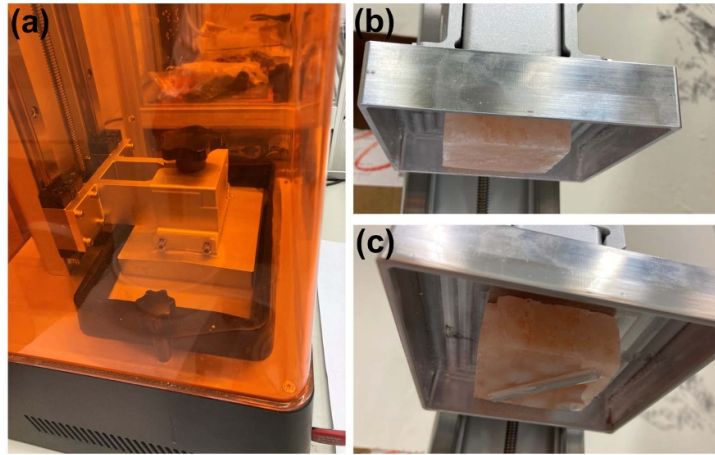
Fabrication of AFMSs and samples: (a) the 3D printer for photolithography with photosensitive resin inside its vat, and the building plate is immersed in the resin; (b) the modified building plate before photolithography, which is a rectangular cavity adhered with a salt brick; (c) after photolithography, the material sample is adhered to the salt brick.
